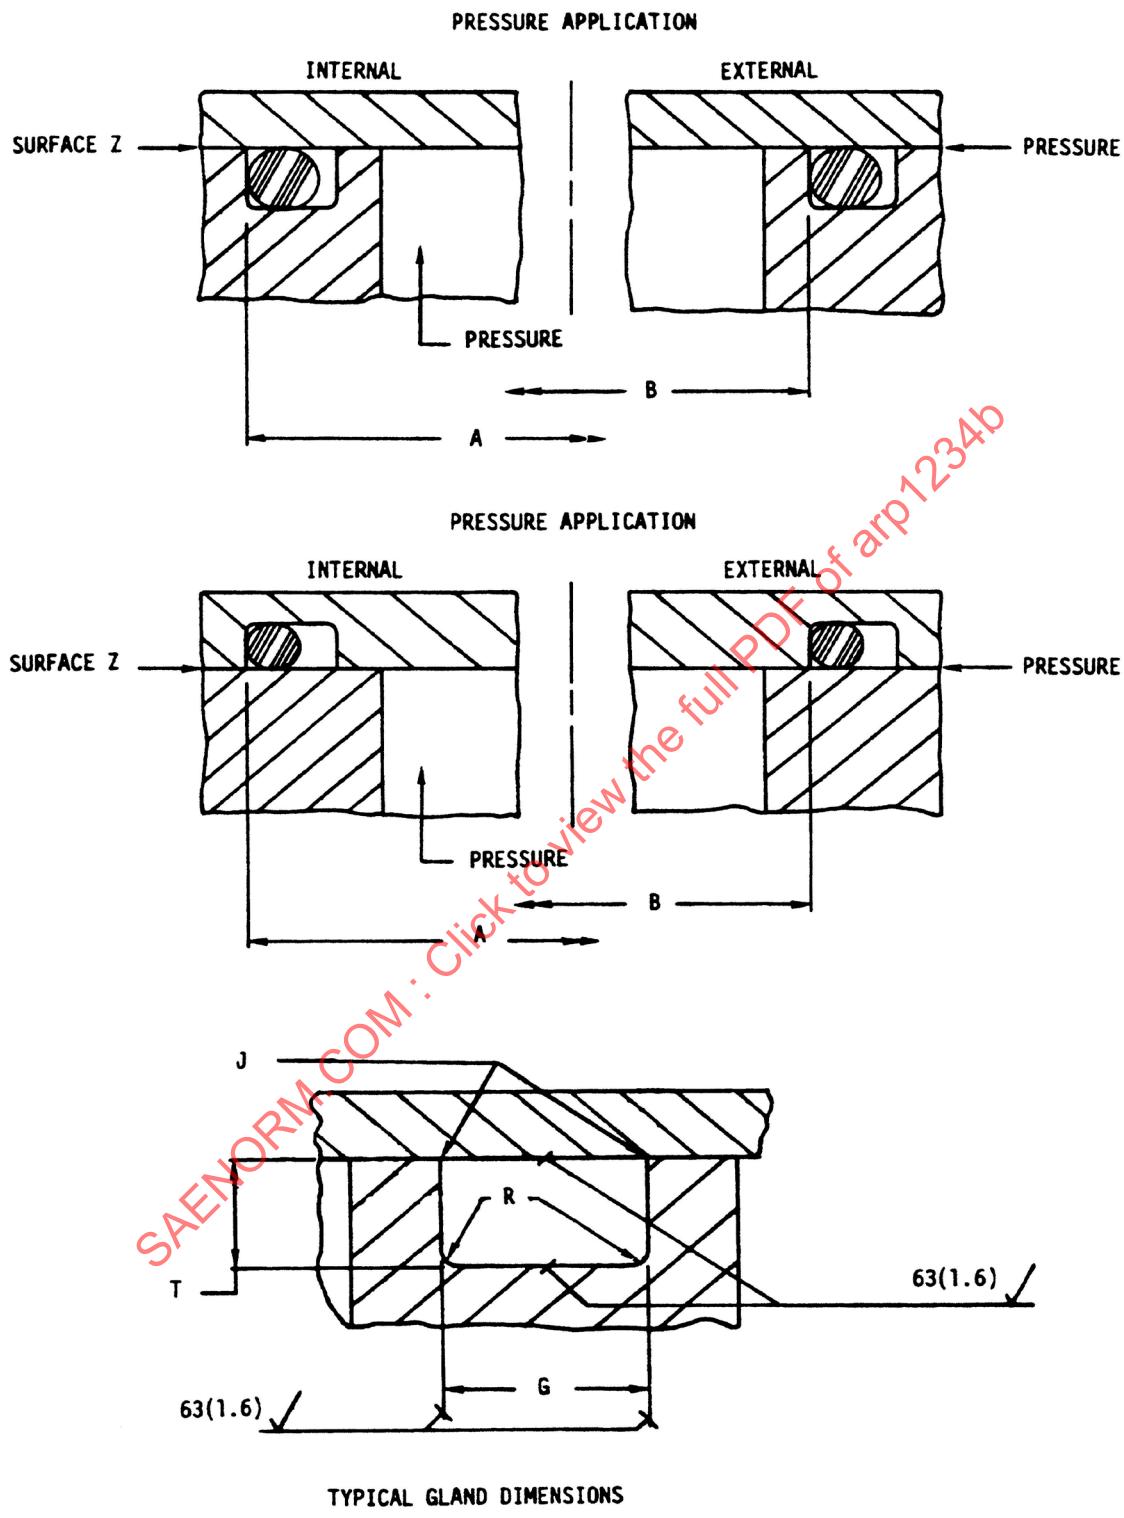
A - O-Ring Seal Axial Gland Preferred Designs
